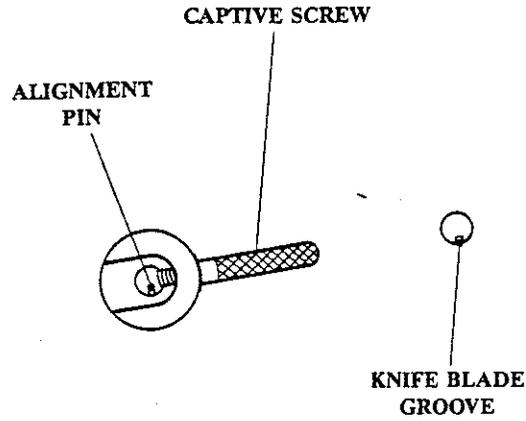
INSTALLING THE BLADE INTO THE KNIFE HOLDER
